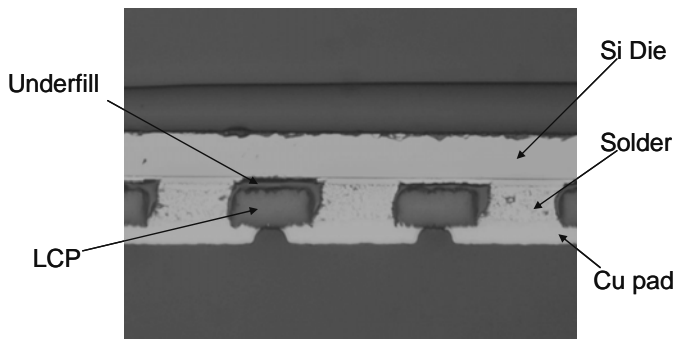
Cross-section of Thinned Low Profile Flip Chip Assembly.
